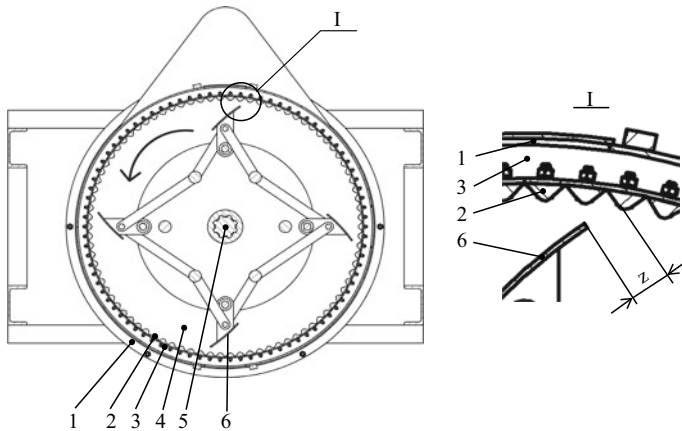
Diagram of a pneumatic threshing chamber: 1—body; 2—deck; 3—reduced pressure chamber; 4—threshing chamber; 5—rotor; 6—blade; z —blade-to-deck clearance
